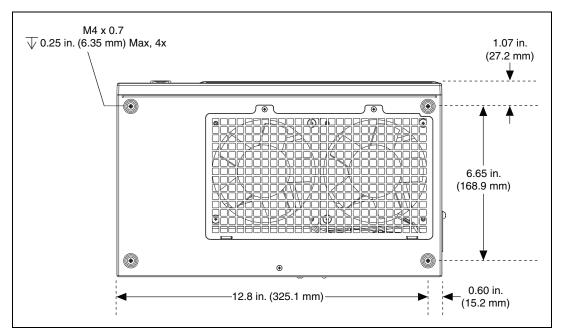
NI PXIe-1078 Chassis Dimensions (Bottom)
